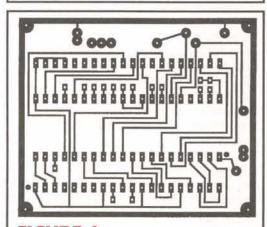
Printed layout of the display board shown full size as seen from the copper side.
